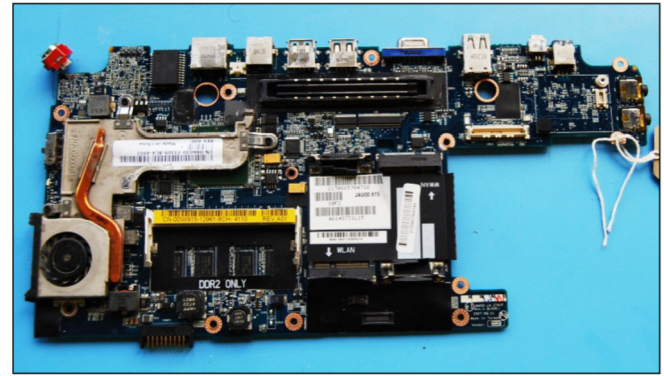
Motherboard & integrated Heatsink and Fan assembly.
